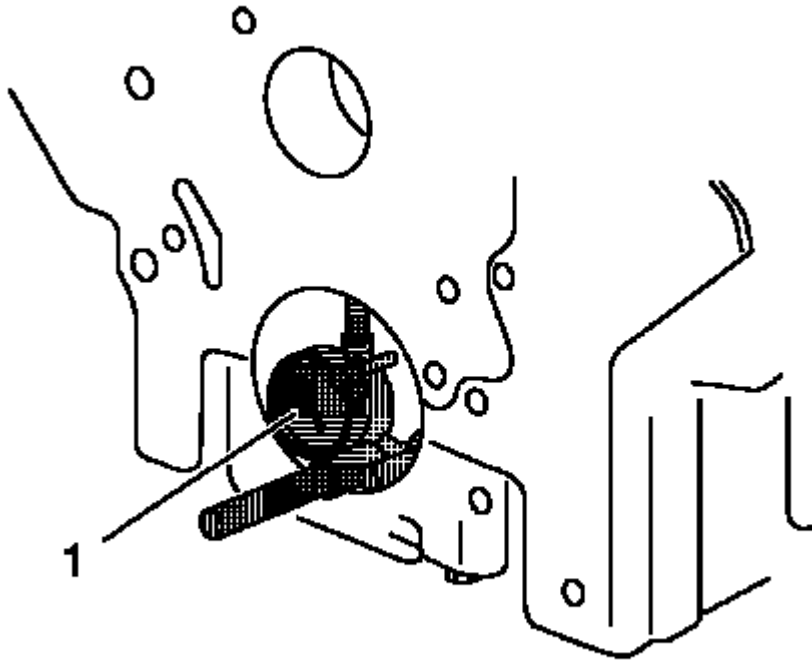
Measuring Bearing Bore Concentricity And Alignment Using Gauge Tool
